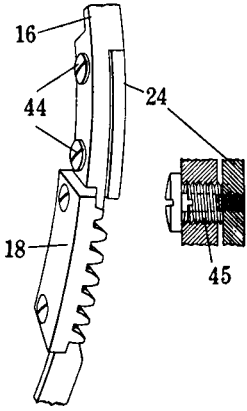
Shows a segment of the gear rack which revolves the shaft turning the mold disk.
